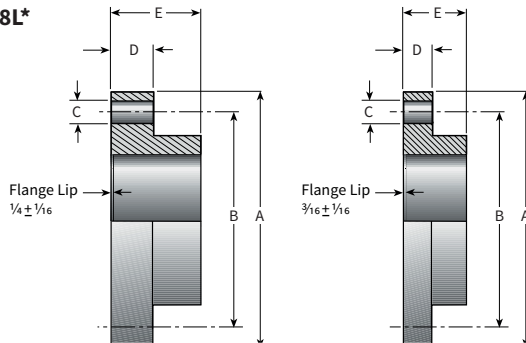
F⁽¹⁾ Eccentric Tapered Flanged
